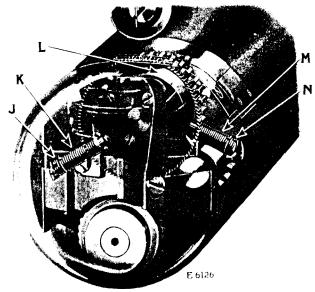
"X-Ray" View of End of Cylinder Bed Showing Adjustments for Raising and Lowering Feed Wheel
